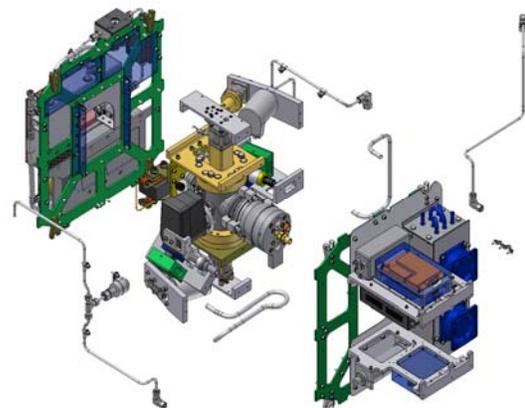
Exploded View of the Vulcan-TP Experiment Module
